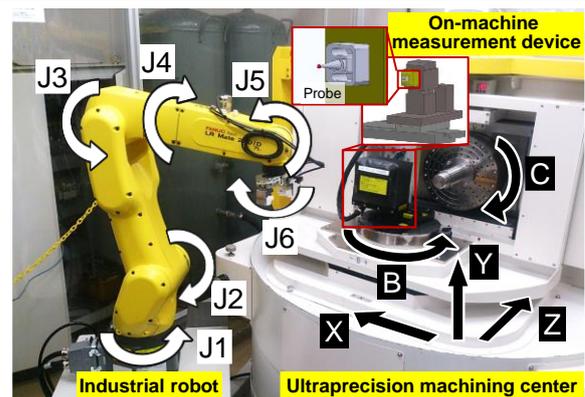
Ultraprecision machining center equipped with on-machine measurement device and industrial robot
